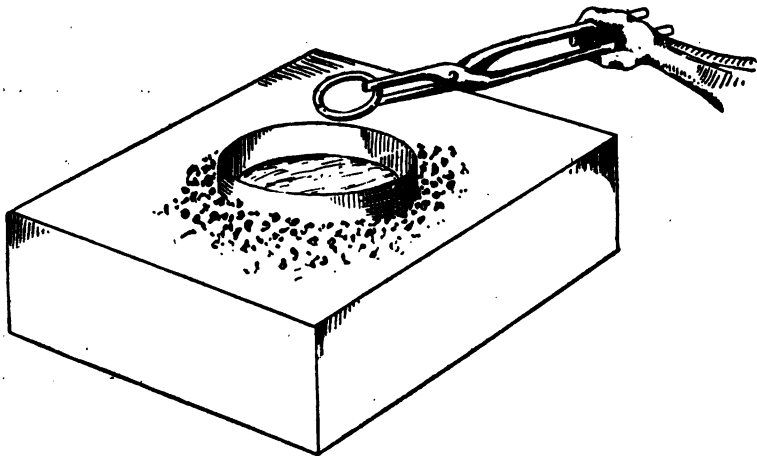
,640.—Brazing by immersion or dipping. The brazing solder is melted in a pot on the coal fire, as shown, or better in a gas furnace, flux being placed on top of the solder. *In brazing*, hold the object first in the flux a little while to heat and coat the article with a film of flux. Then, when it is lowered into the solder, the latter will flow in the joint and firmly attach itself. Before dipping, the article to be brazed is coated with a special anti-flux graphite, covering all the surface except that which is to be brazed. The layer of flux in the pot may be kept from  $\frac{1}{4}$  inch to 2 inches deep.
